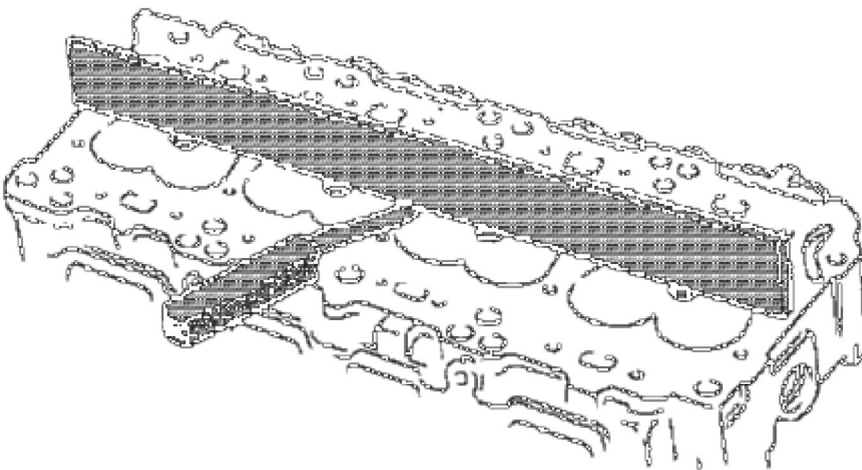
Inspecting Cylinder Head Deck Surface for Flatness
